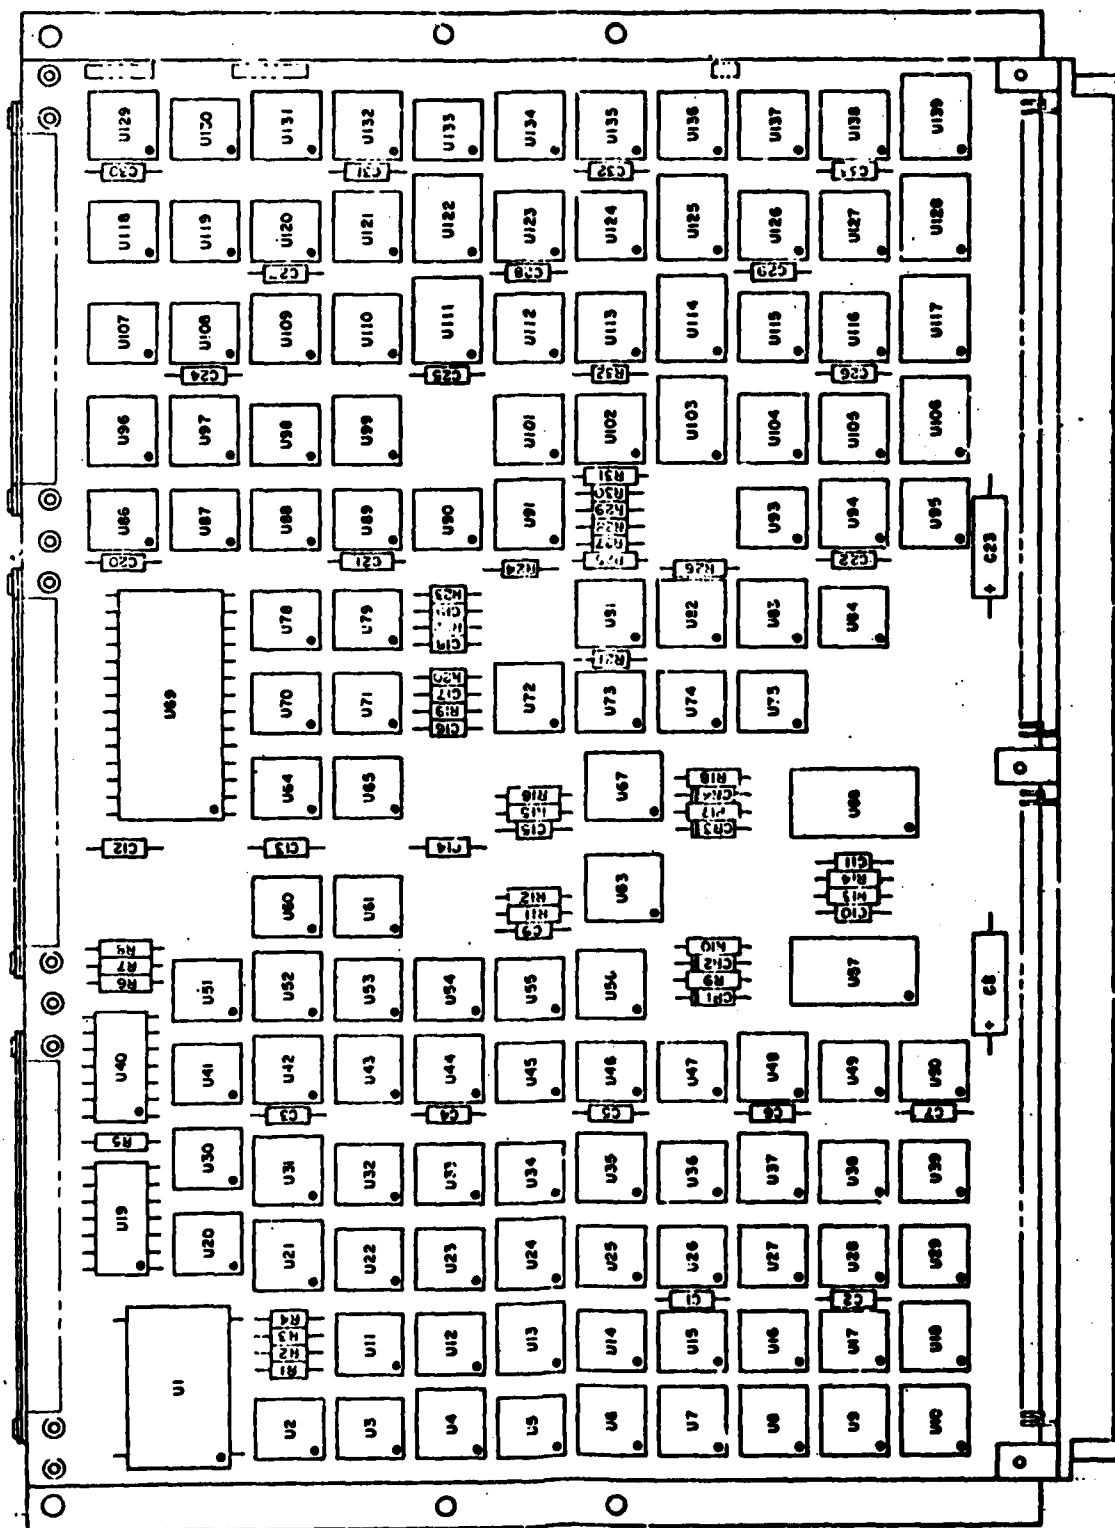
NTDS (Serial) Interface Module, Circuit Card Assembly
